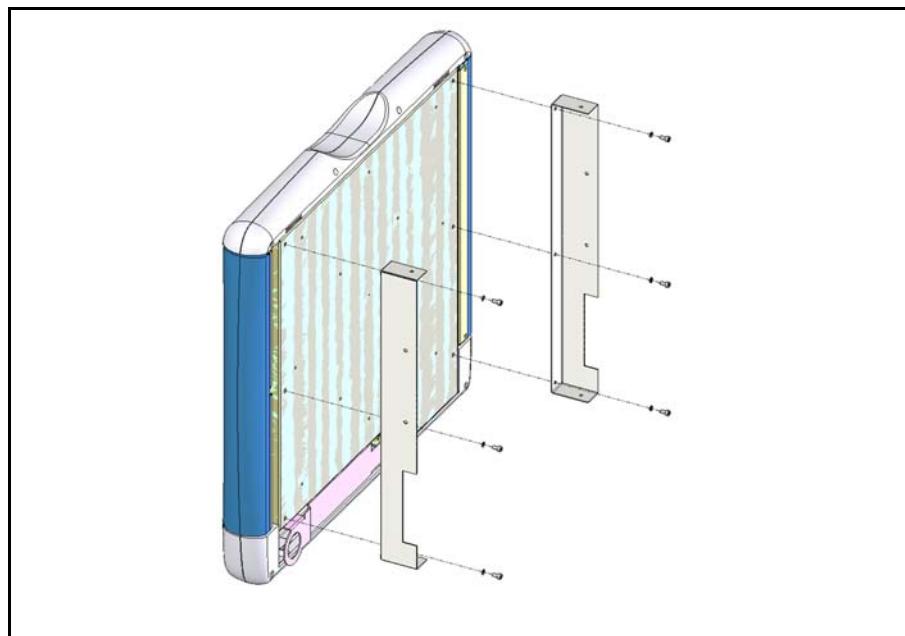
A-2. CMT Left-Right Corner Bracket Mounting
